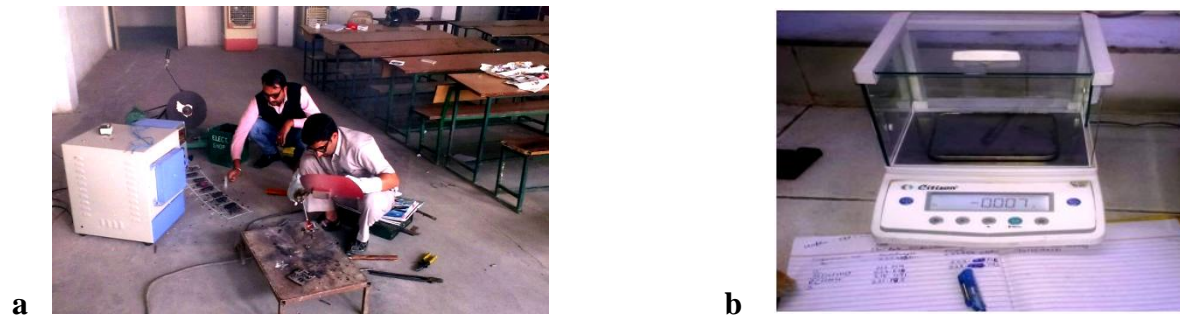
Welding Operation (a) specimens Welded by SMAW (b) Electronic Weight Measuring Machine
